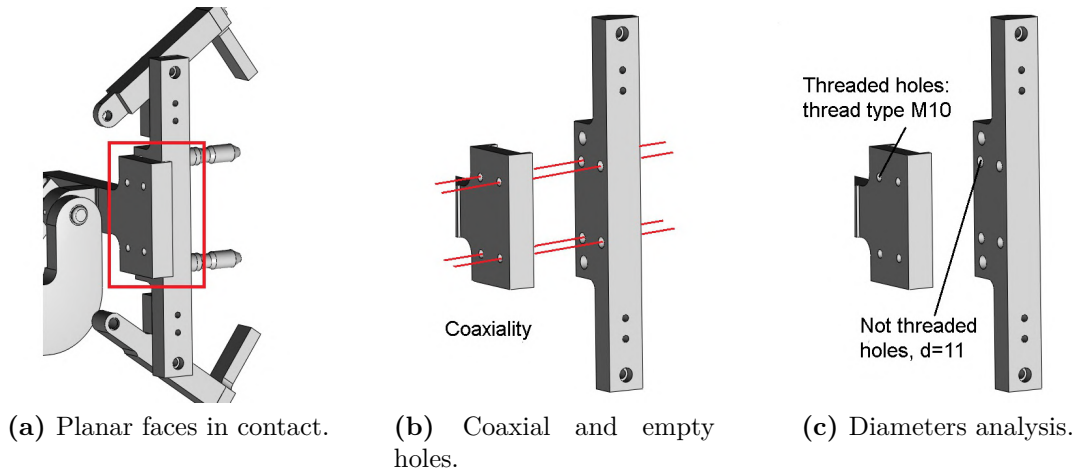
Example of the issue of missing components in a gripper mechanism.
